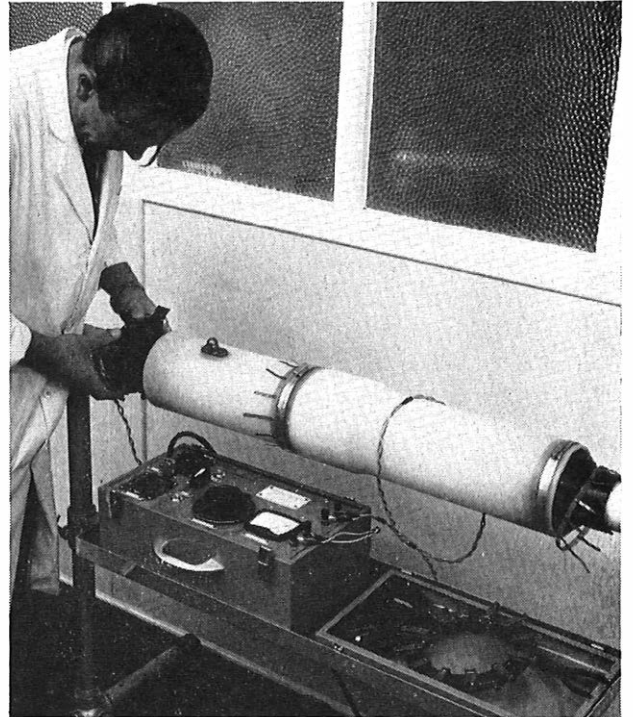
ELECTRIC-WELDED JOINT
